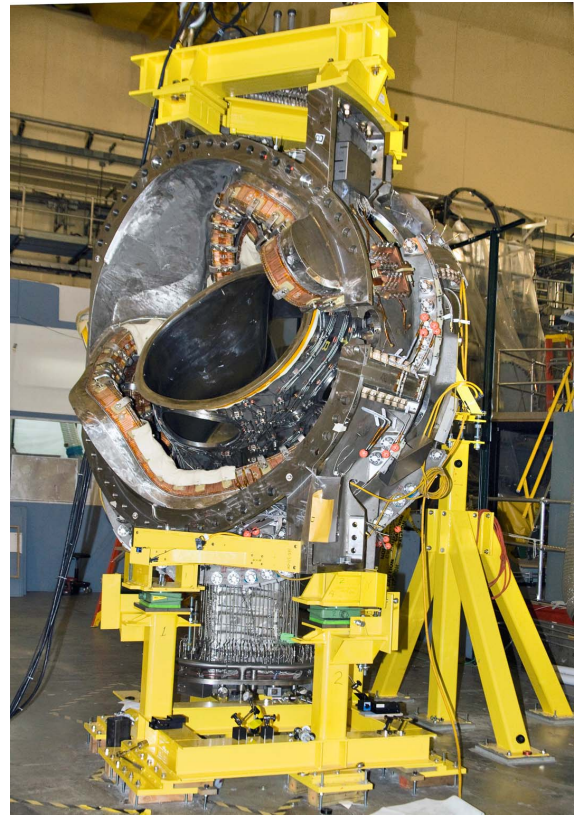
Trial installation of half-period assembly over vacuum vessel sector
